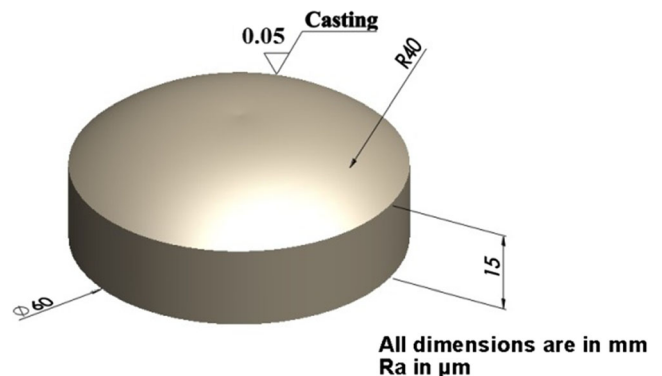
CAD model of workpiece to be polished using compliant polishing tool
